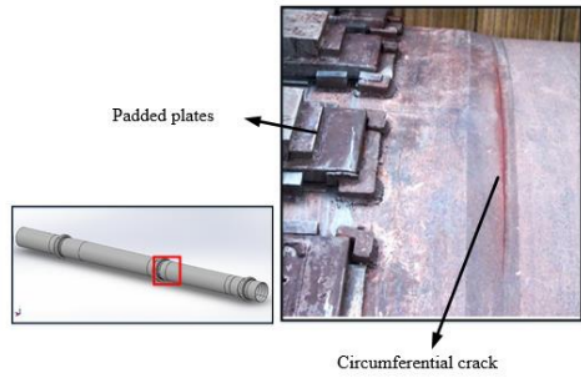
Crack in rotary welded shell kiln near the supporting tyre
